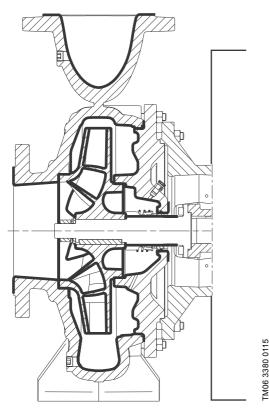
Sectional view of pump coated for seawater between 25 and 65 °C
